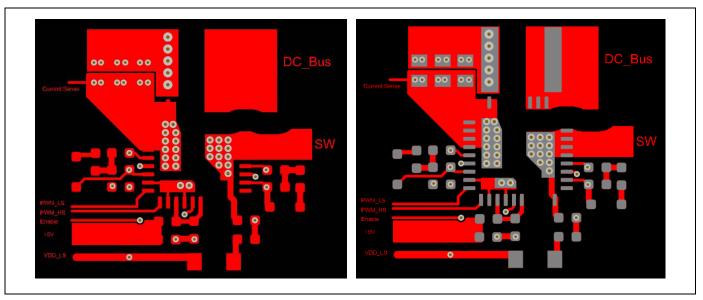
Top layer of the PCB (trace on the left and top solder paste layer on the right)
